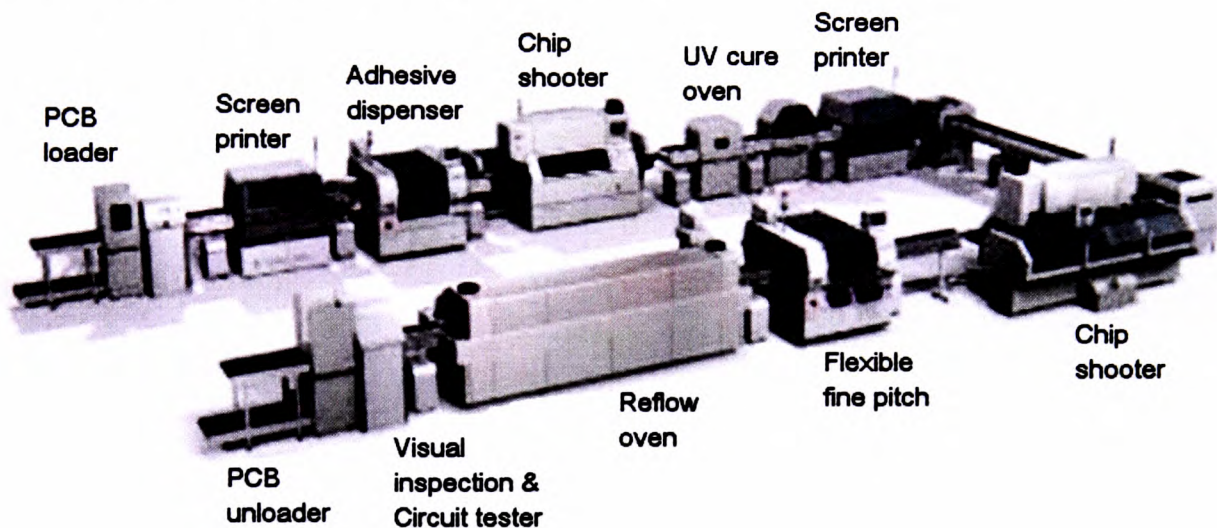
Typical manufacturing line for assembly of SMD components onto PCB. (Fisher *et al*, 2000)
